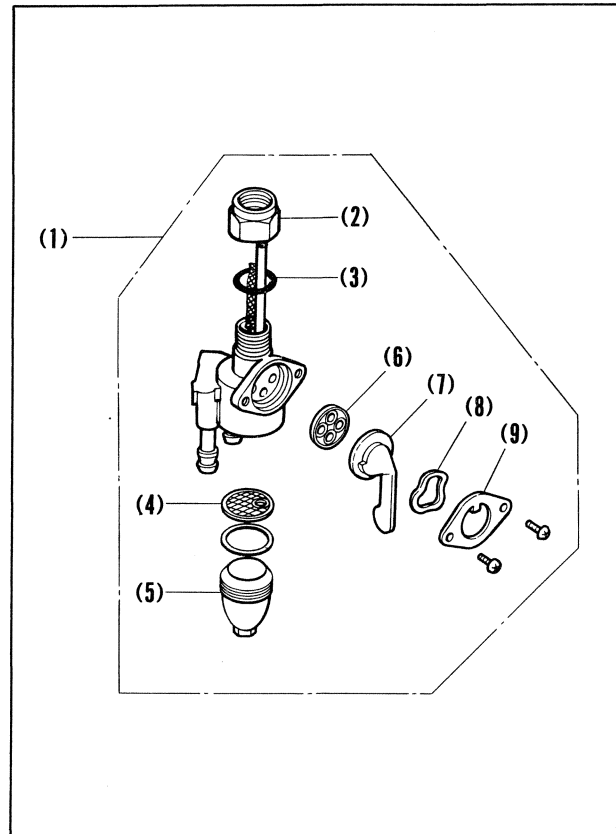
(1) Fuel valve Assy. (6) Valve gasket
